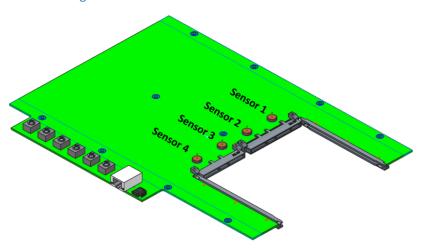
LFF Card Thermal Test Fixture Design – Cover Removed
